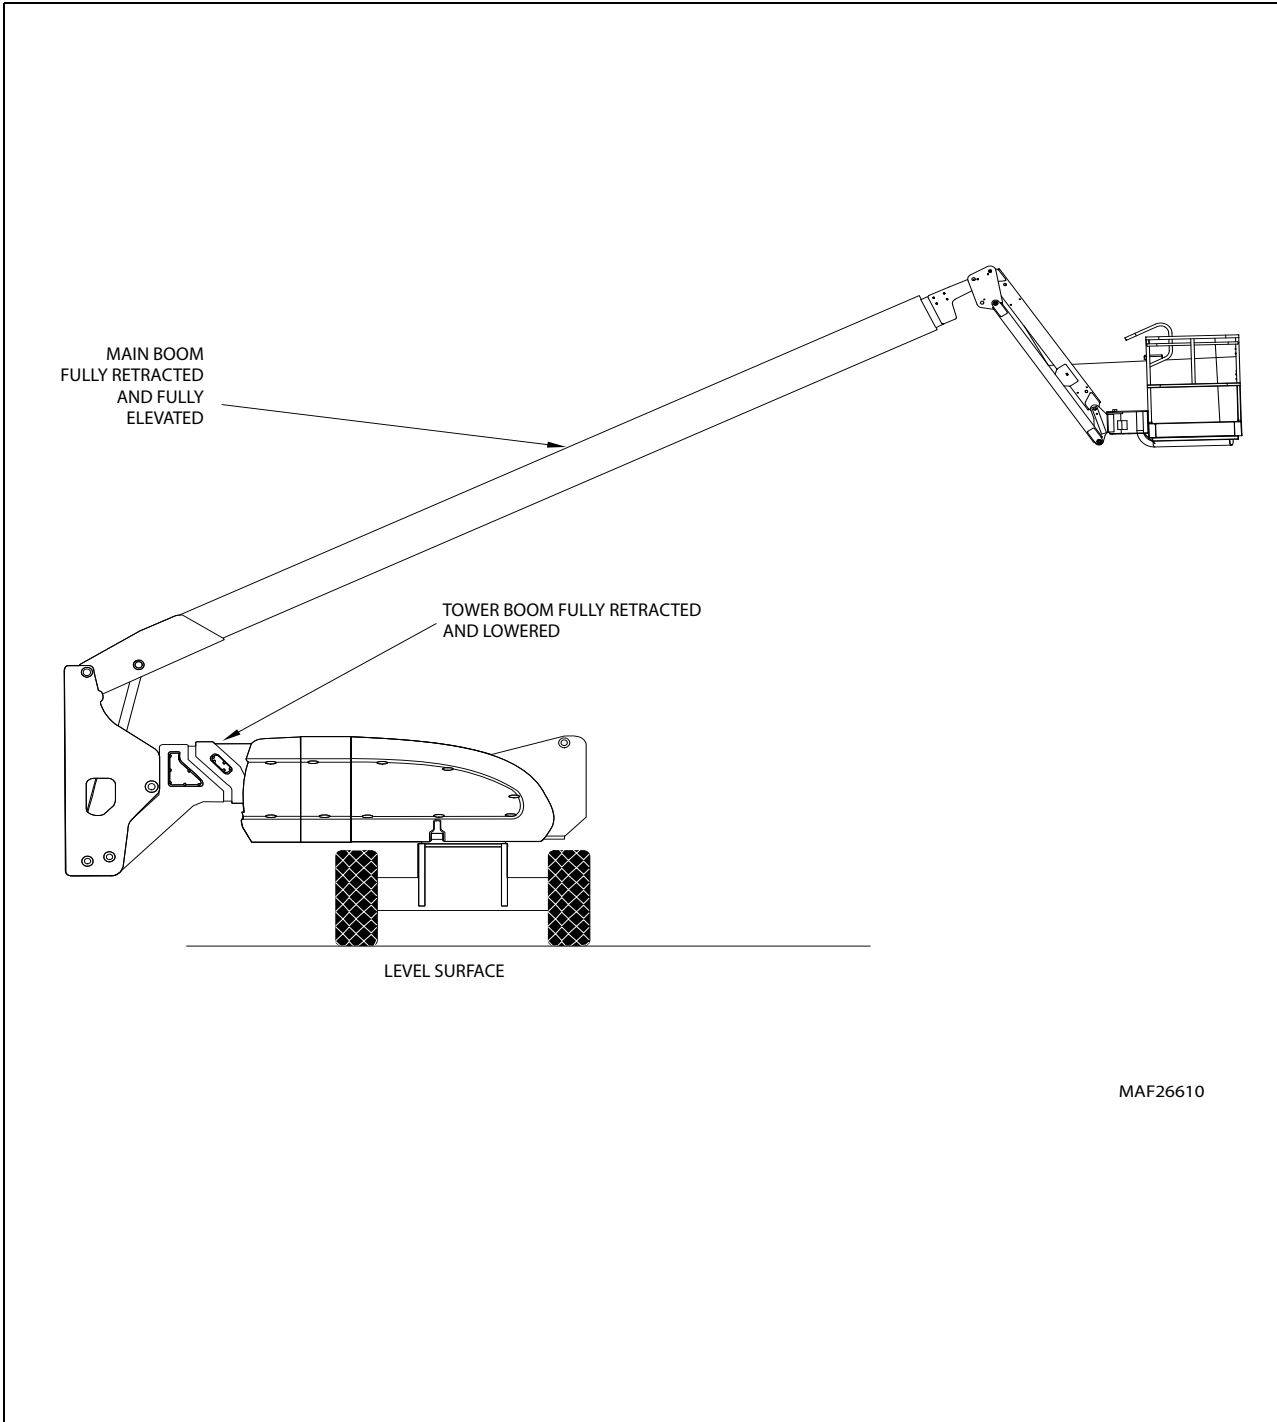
Swing Bearing Tolerance Boom Placement - Sheet 2 of 2
